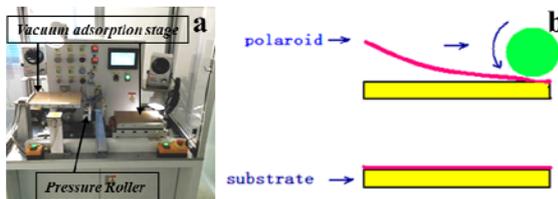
(a) the polaroid bonding machine used in this study and (b) the schematic illustration of the machine's working principle.
